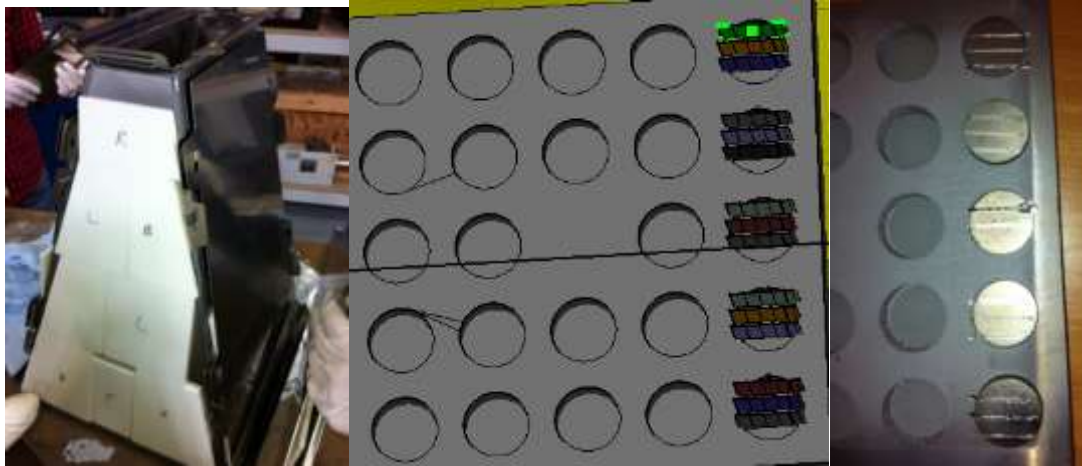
a) Ceramic, extra insulating plates placed onto heat shield, b) STL- file of the sample holder with the dummy wafer supports (15 weld tracks) and c) resulting weld tracks
